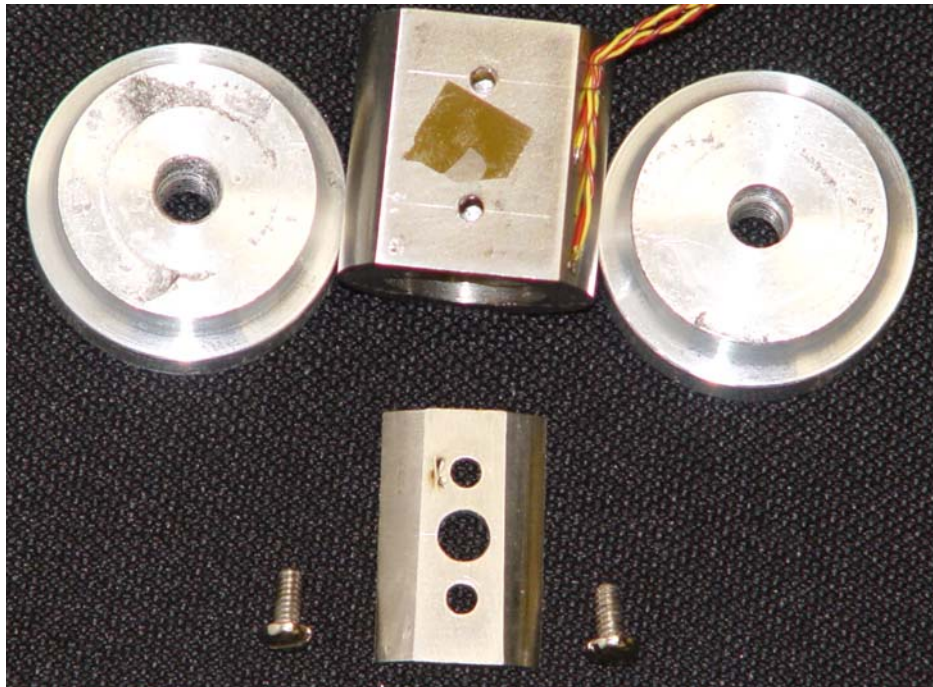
Disassembled hollowed cylinder and faceplate with sesnor
